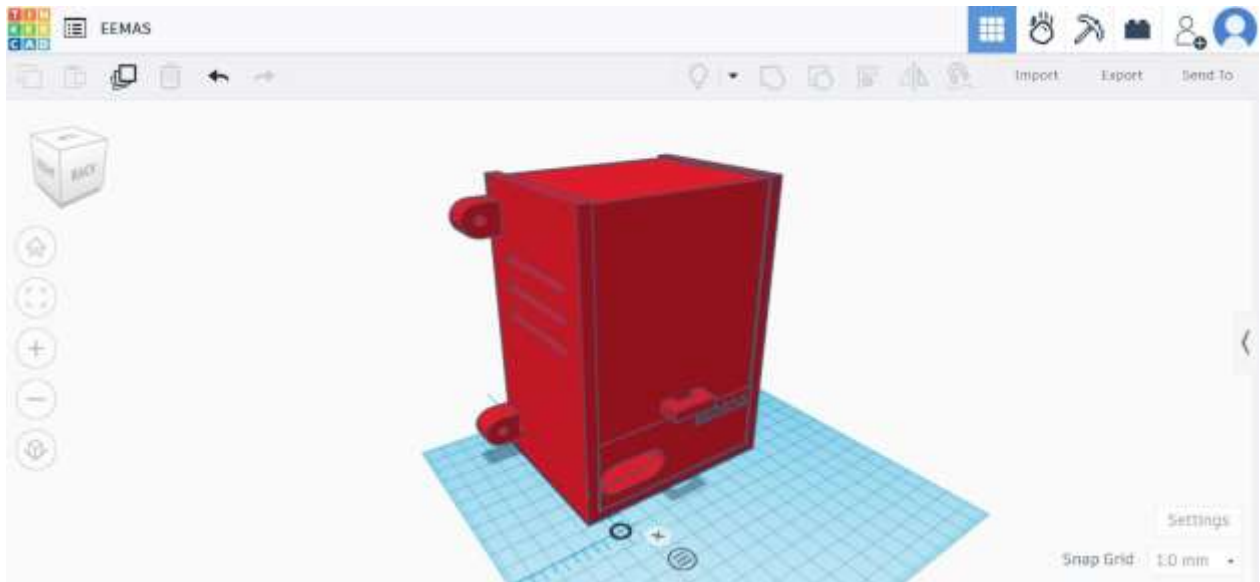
CAD Design of “EEMAS” Chassis using TinkerCad
